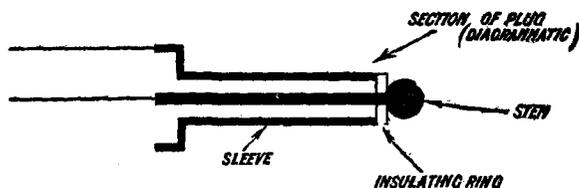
A sectional drawing of a plug, the fine lines on the left representing the connecting wires to the telephones or loud-speaker.
